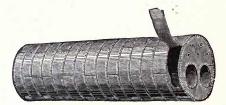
Explosion of a Lancashire-boiler from corrosion caused by contact with damp brickwork.
